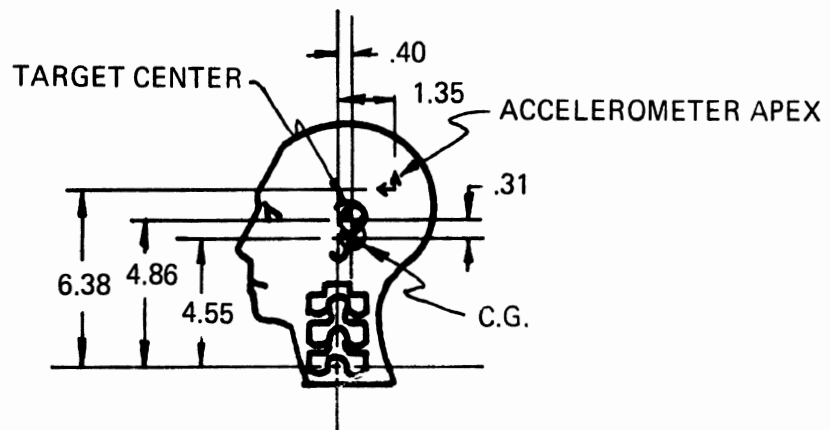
Centers-of-gravity and dimensions of head and upper torso.
